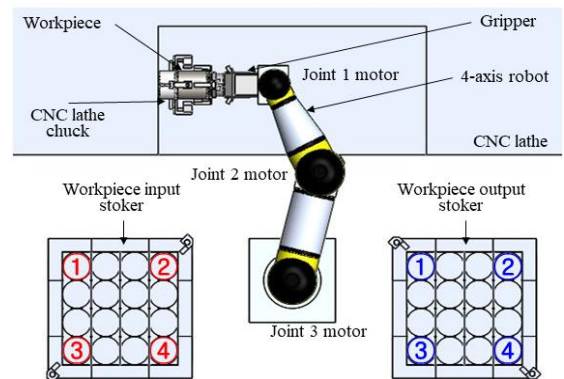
Use principle of 4-axis dedicated robot for CNC lathe
